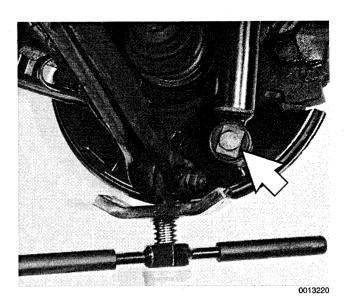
Support trailing arm before removing lower shock bolt (arrow).
